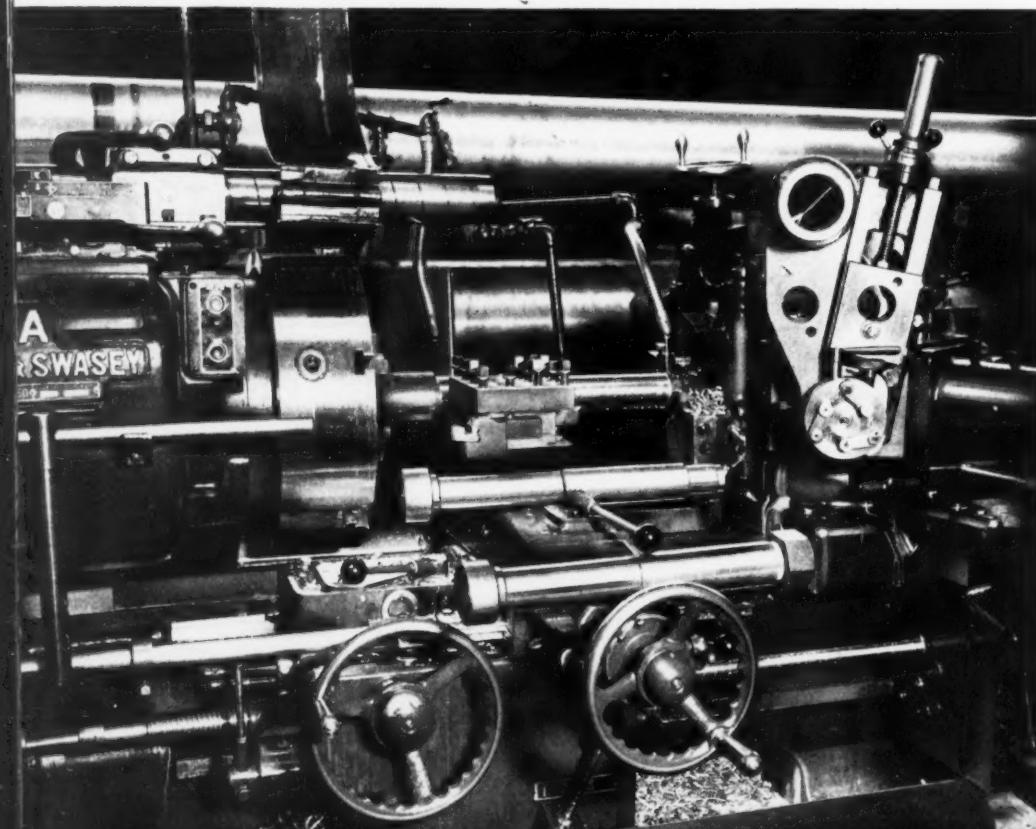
Turret Lathe Toolled up for Producing Bolts $21 \frac{1}{4}$ Inches in Length, Having a $3 \frac{1}{2}$ -inch Head Diameter
